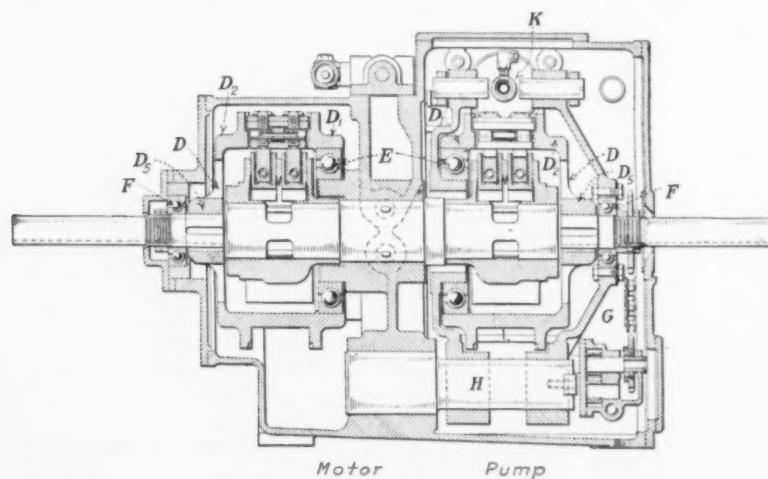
OILGEAR HYDRAULIC-TRANSMISSION VARIABLE-SPEED DRIVE, LONGITUDINAL SECTION
